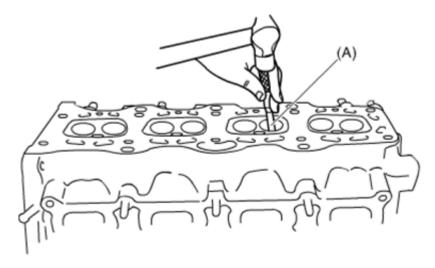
Removing Valve Guide Courtesy of SUZUKI OF AMERICA CORP.
